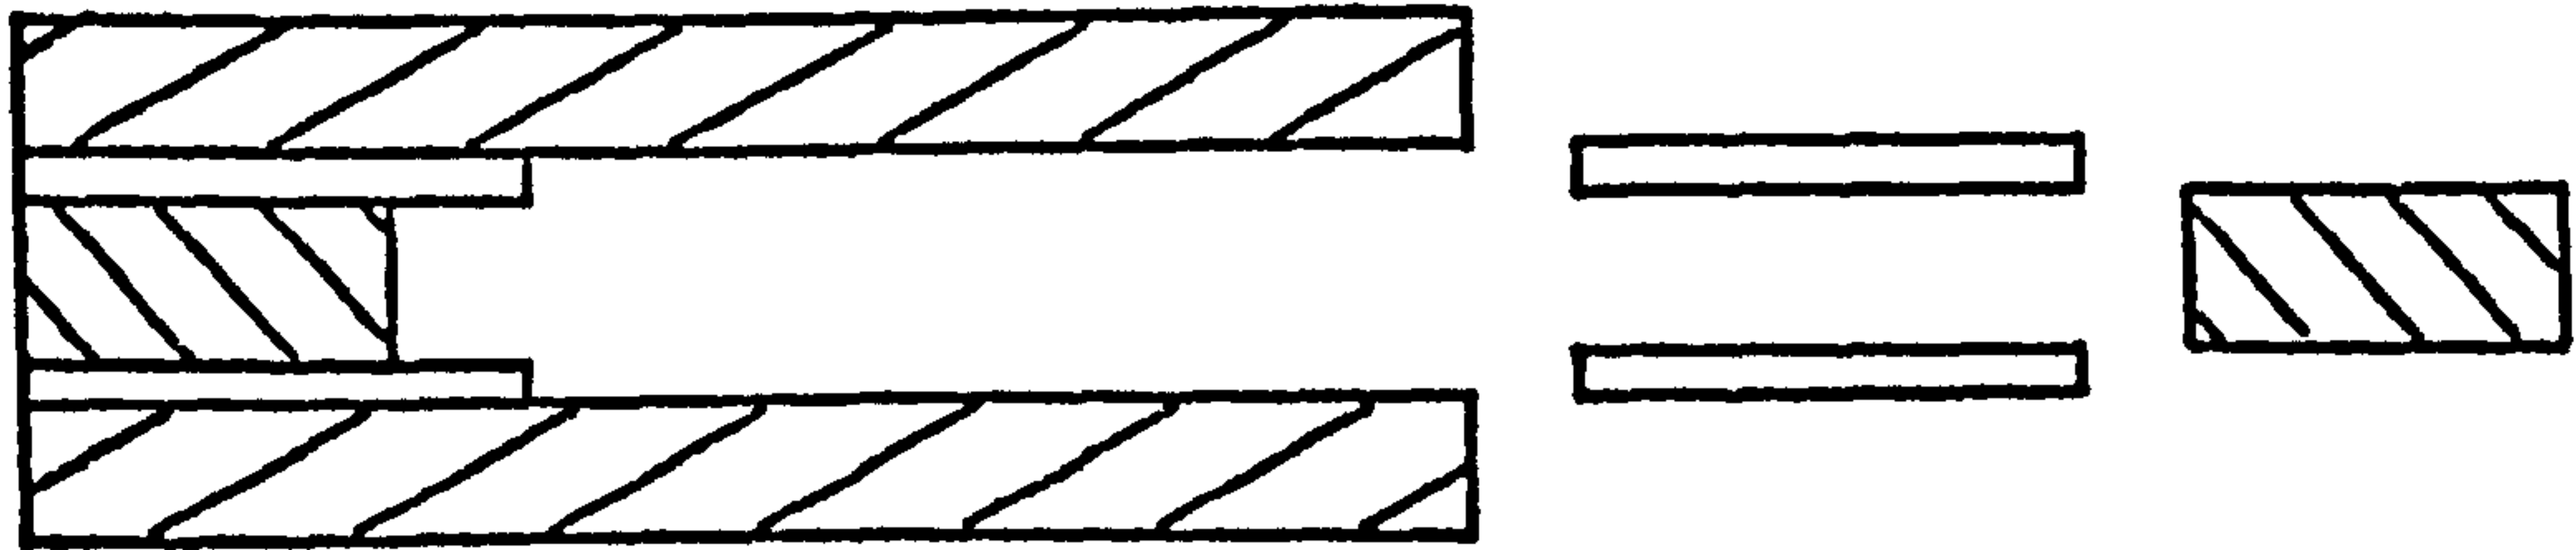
The hardened steel jig used for aligning the ceramic foil bearing axles in the rotor bodies (actual size)
